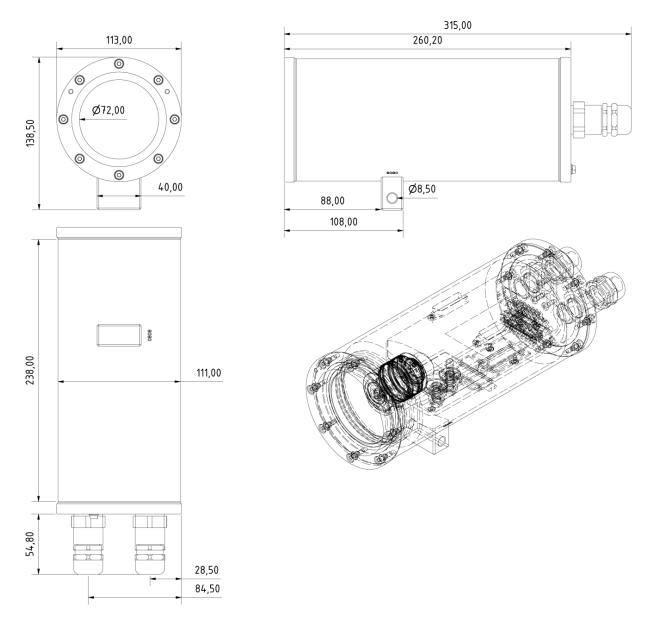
Dimensions of the T08 ExCam IP13xx with K1 flange
